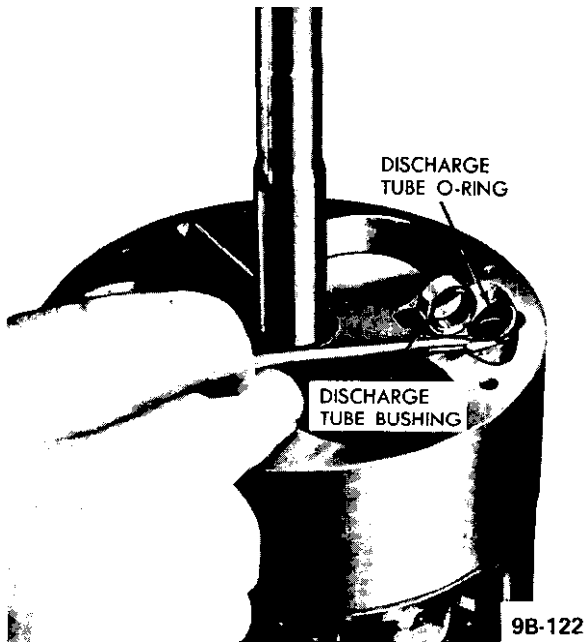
B-152 Installing Discharge Tube O-Ring and Bushing
